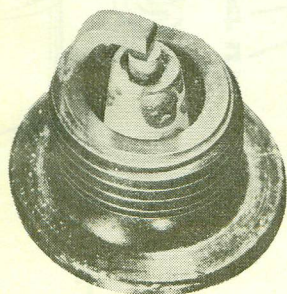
Appearance of spark plug indicating splash fouling. Carbon deposits which have accumulated during a long period may be loosened suddenly upon installation of new spark plugs. When the newly tuned engine is placed under load, excess carbon deposits shed off the piston and are thrown against the hot insulator surface. These deposits can foul the plug, but can be removed from the plug by cleaning.
